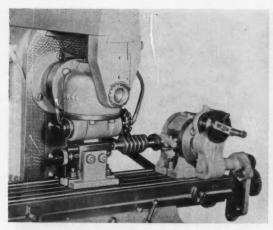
Greaves universal milling attachment set up to machine a spiral.
